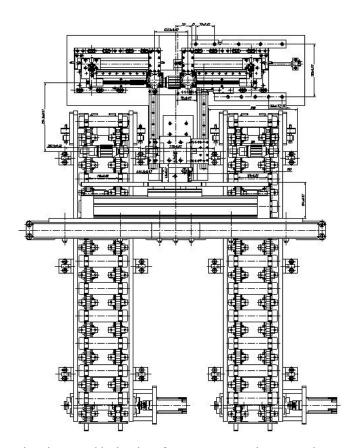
Design engineering assembly drawing of motor rotor snap ring automatic press fitting machine
